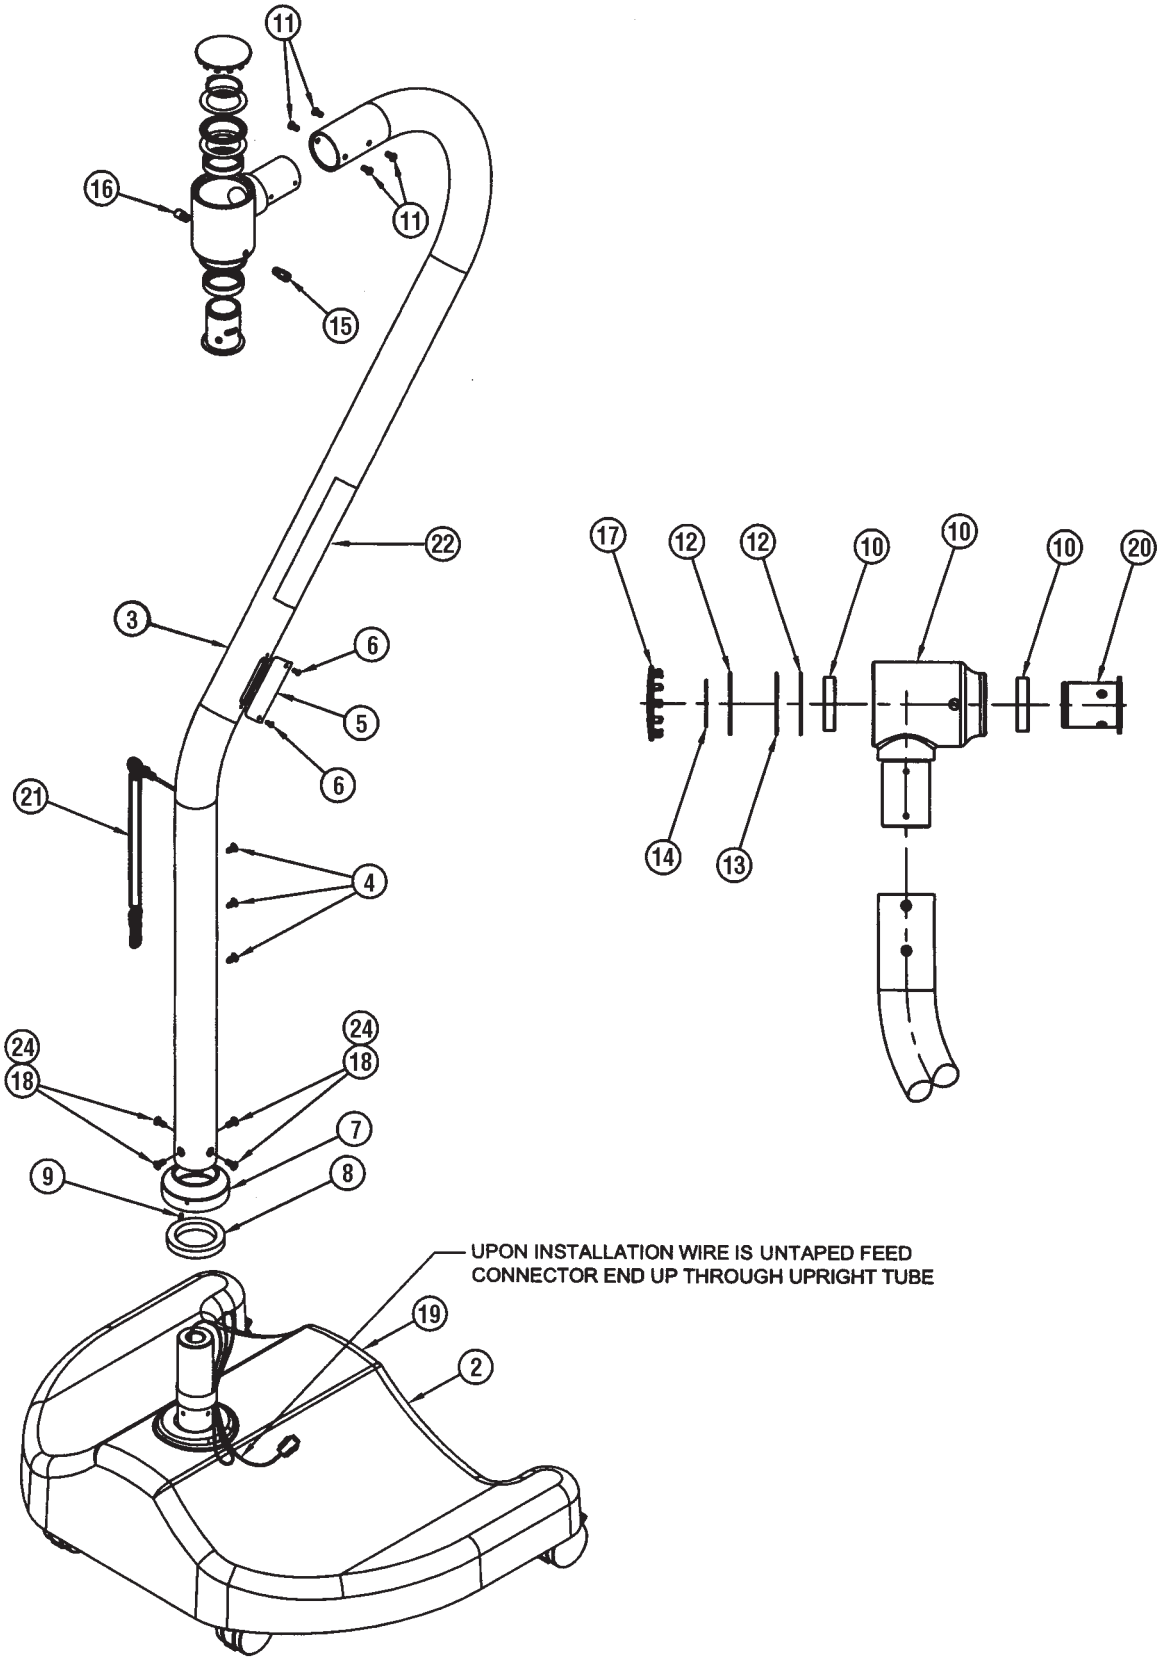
Harmony LA 500 Mobile Stand Assembly
